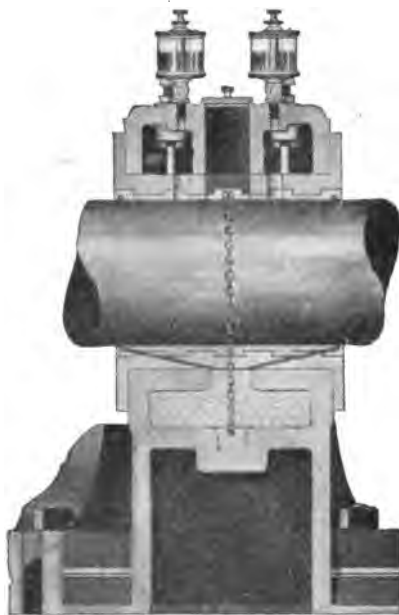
Main bearing, showing oil cellar (transverse section)
